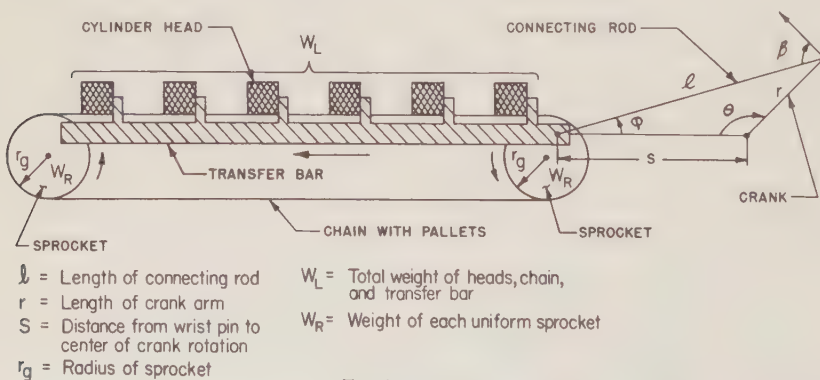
This schematic diagram illustrates the connecting rod and crank transfer mechanism.
